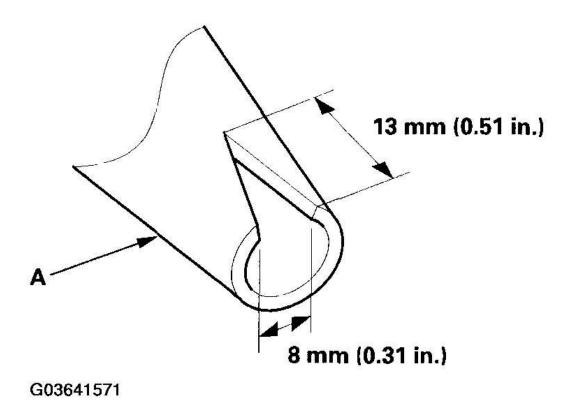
Cutting "V" End Of Nozzle On Adhesive Cartridge Courtesy of AMERICAN HONDA MOTOR CO., INC.
